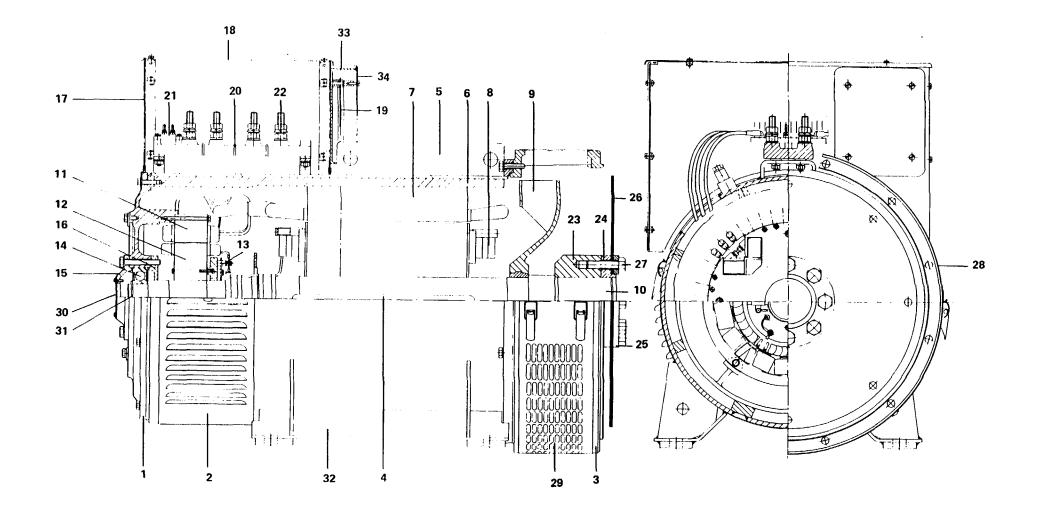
SC3 SINGLE BEARING MACHINE (INBOARD EXCITER)
